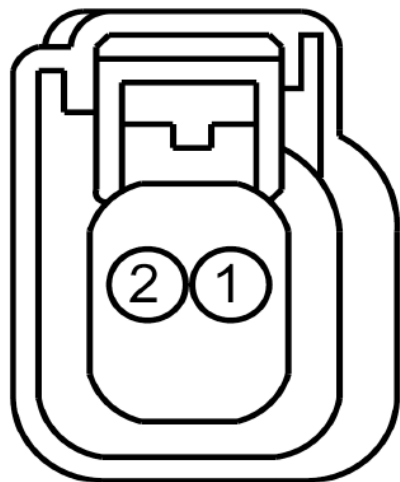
Left Front Side Lamp Connector End View (C1443)
